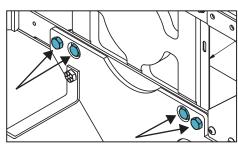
1 - 36 Check Torque on Drive Arm Cinch Bolt
